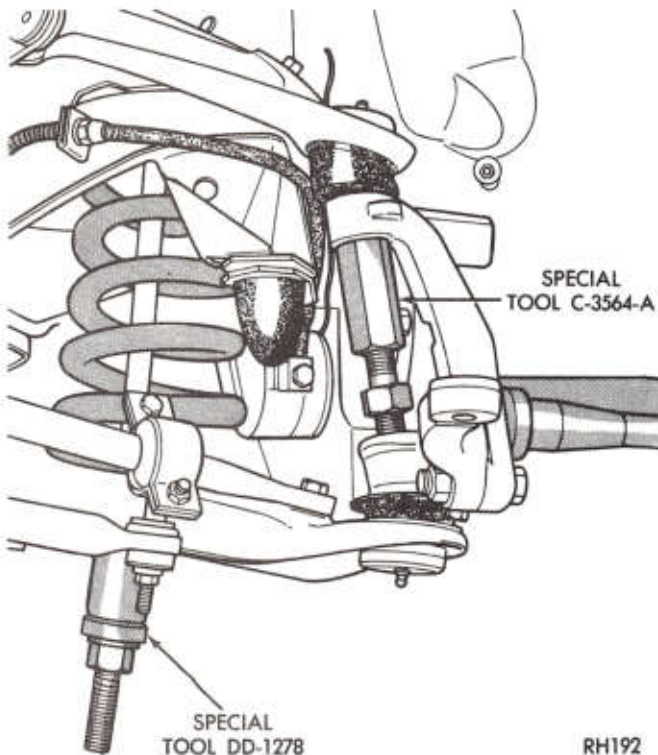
Ball Joint Breaker and Spring Compressor Tools Installed
